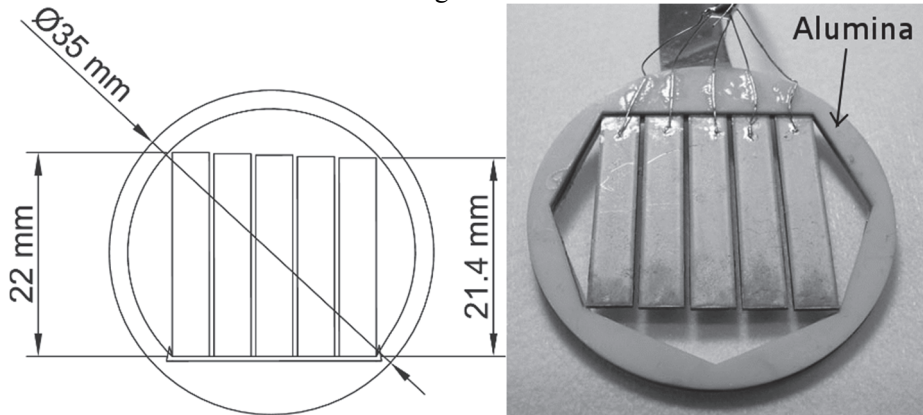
a) The dimensions and b) the manufactured prototype [Paper III, published by permission of Suomen Automaatioseura].
